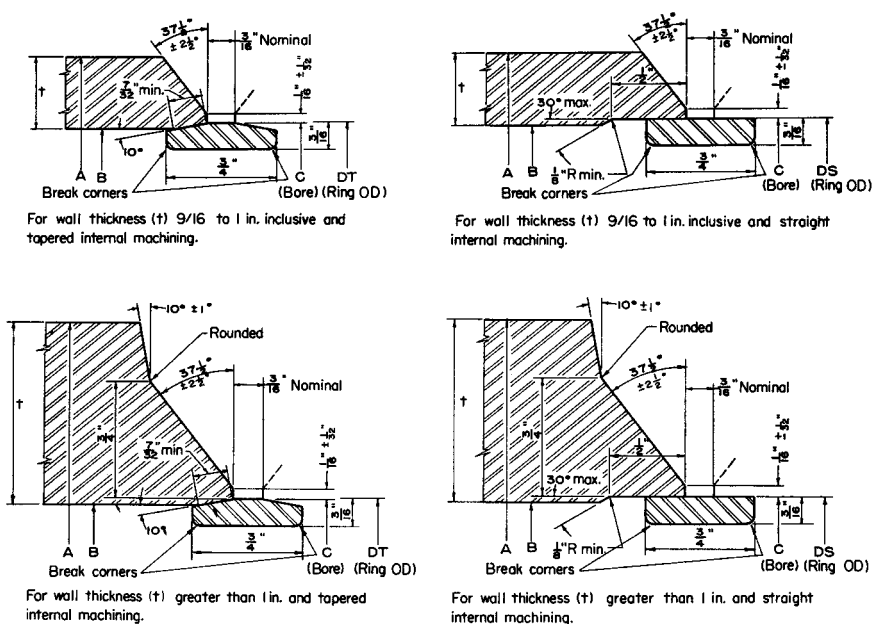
End preparation and backing-ring requirements for critical-service applications employing flat or taper-machined solid backing rings. See Table A2.21 for dimensional data.
